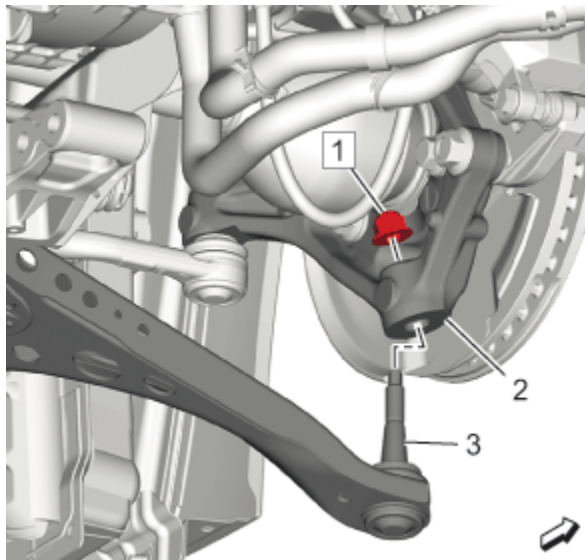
Steering Knuckle, Lower Ball Joint And Nut
